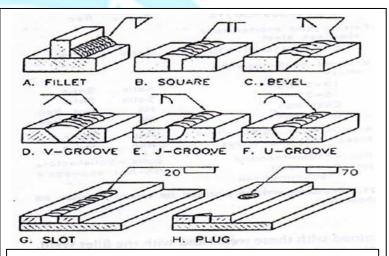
These views illustrate standard weld and their corresponding ideographs
